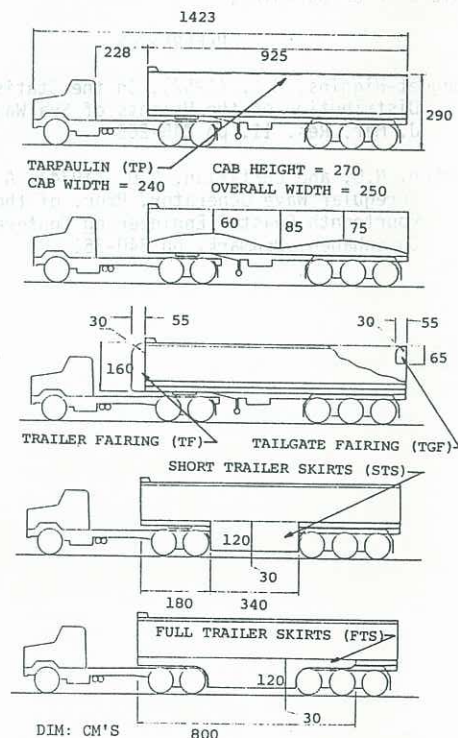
Dimensions of Mack Tipper and Attachments Tested
